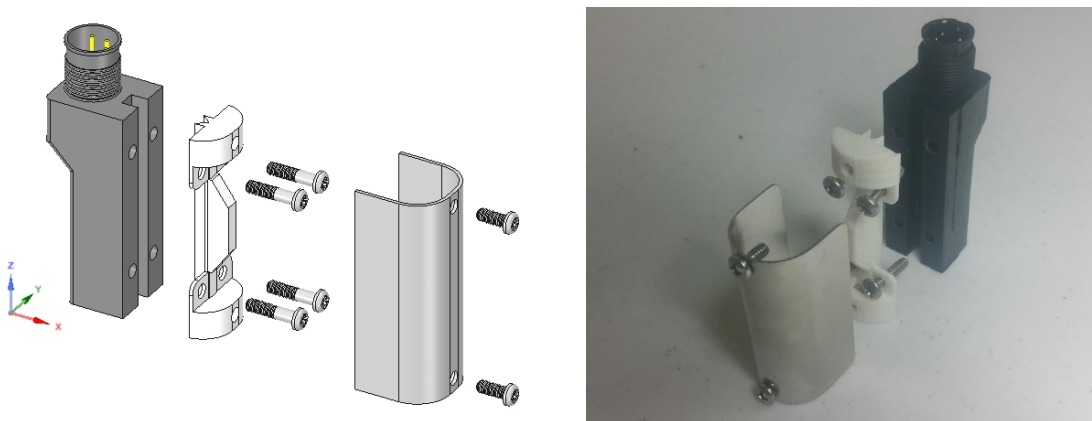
Sensor Module - 3D Views of the Sensor, Stabilizer and Shield
